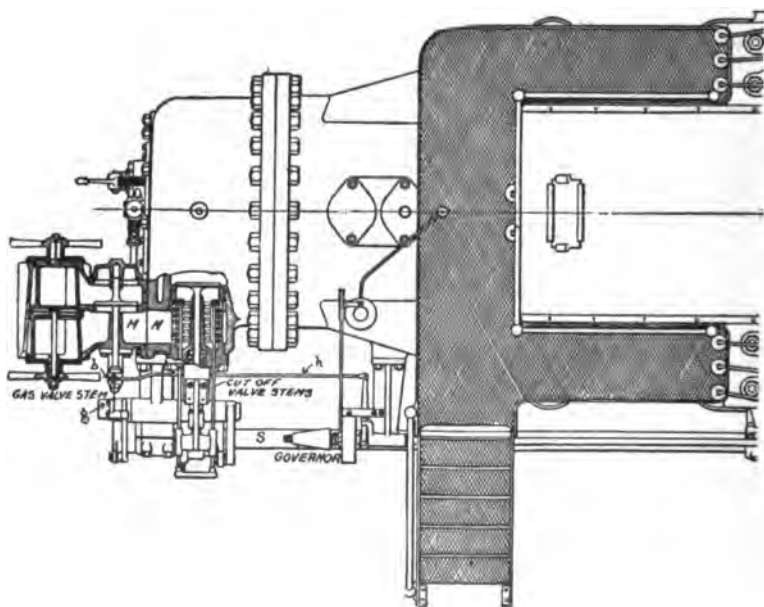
Details of Valve Gear, American Crossley Engine.
